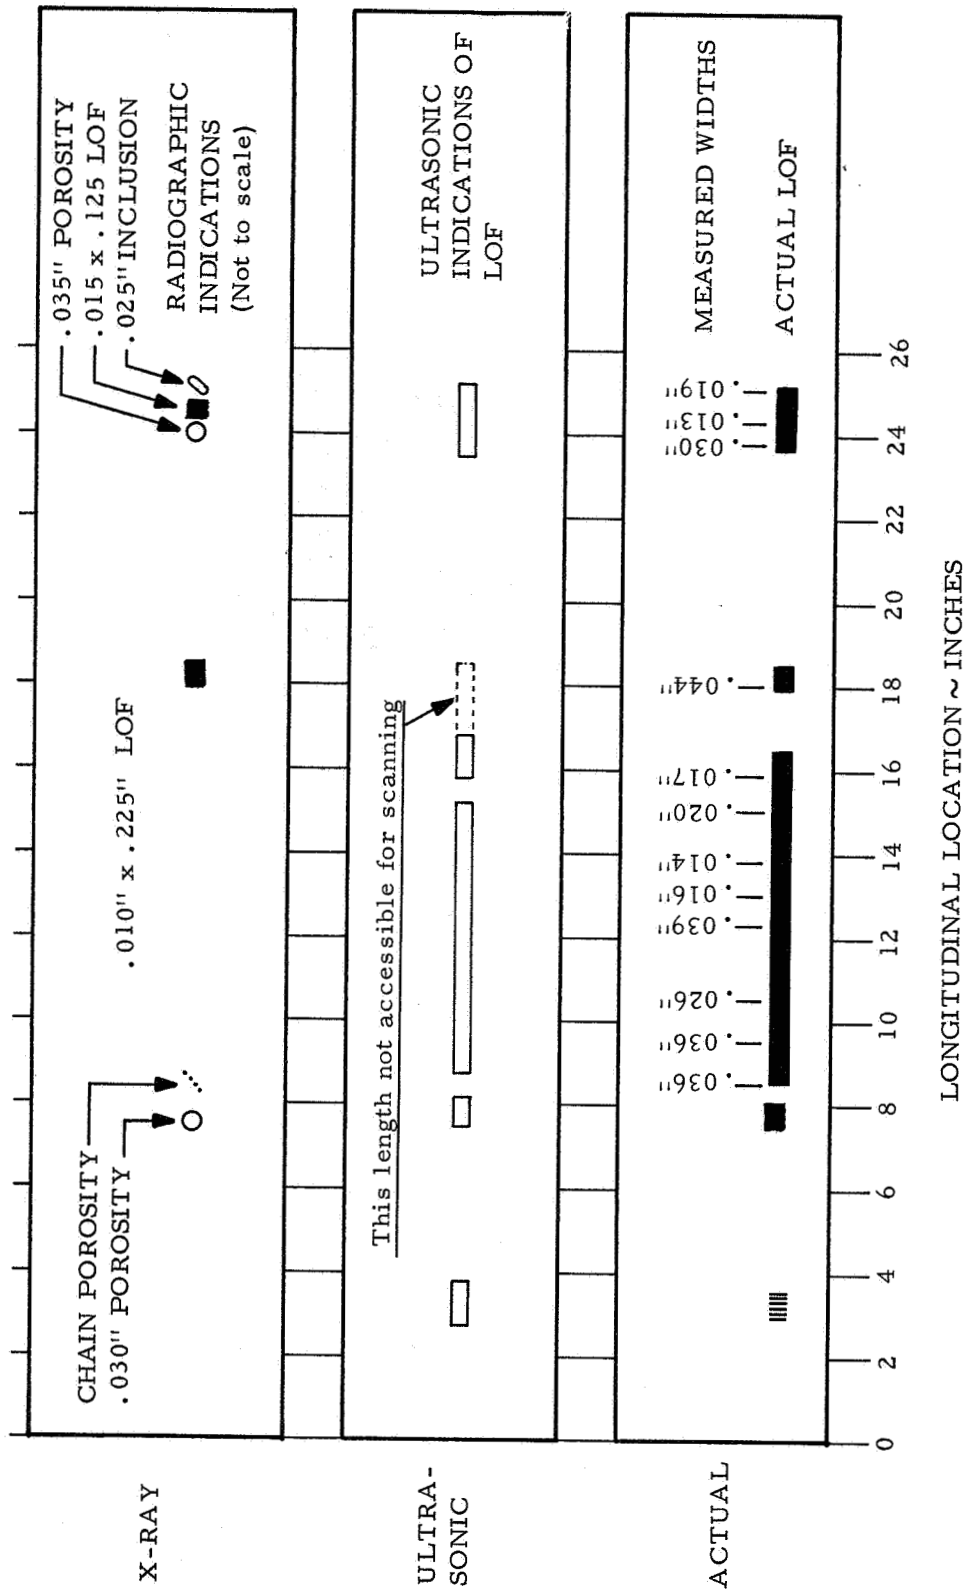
Lack of Fusion in Preproduction Weld Panel
